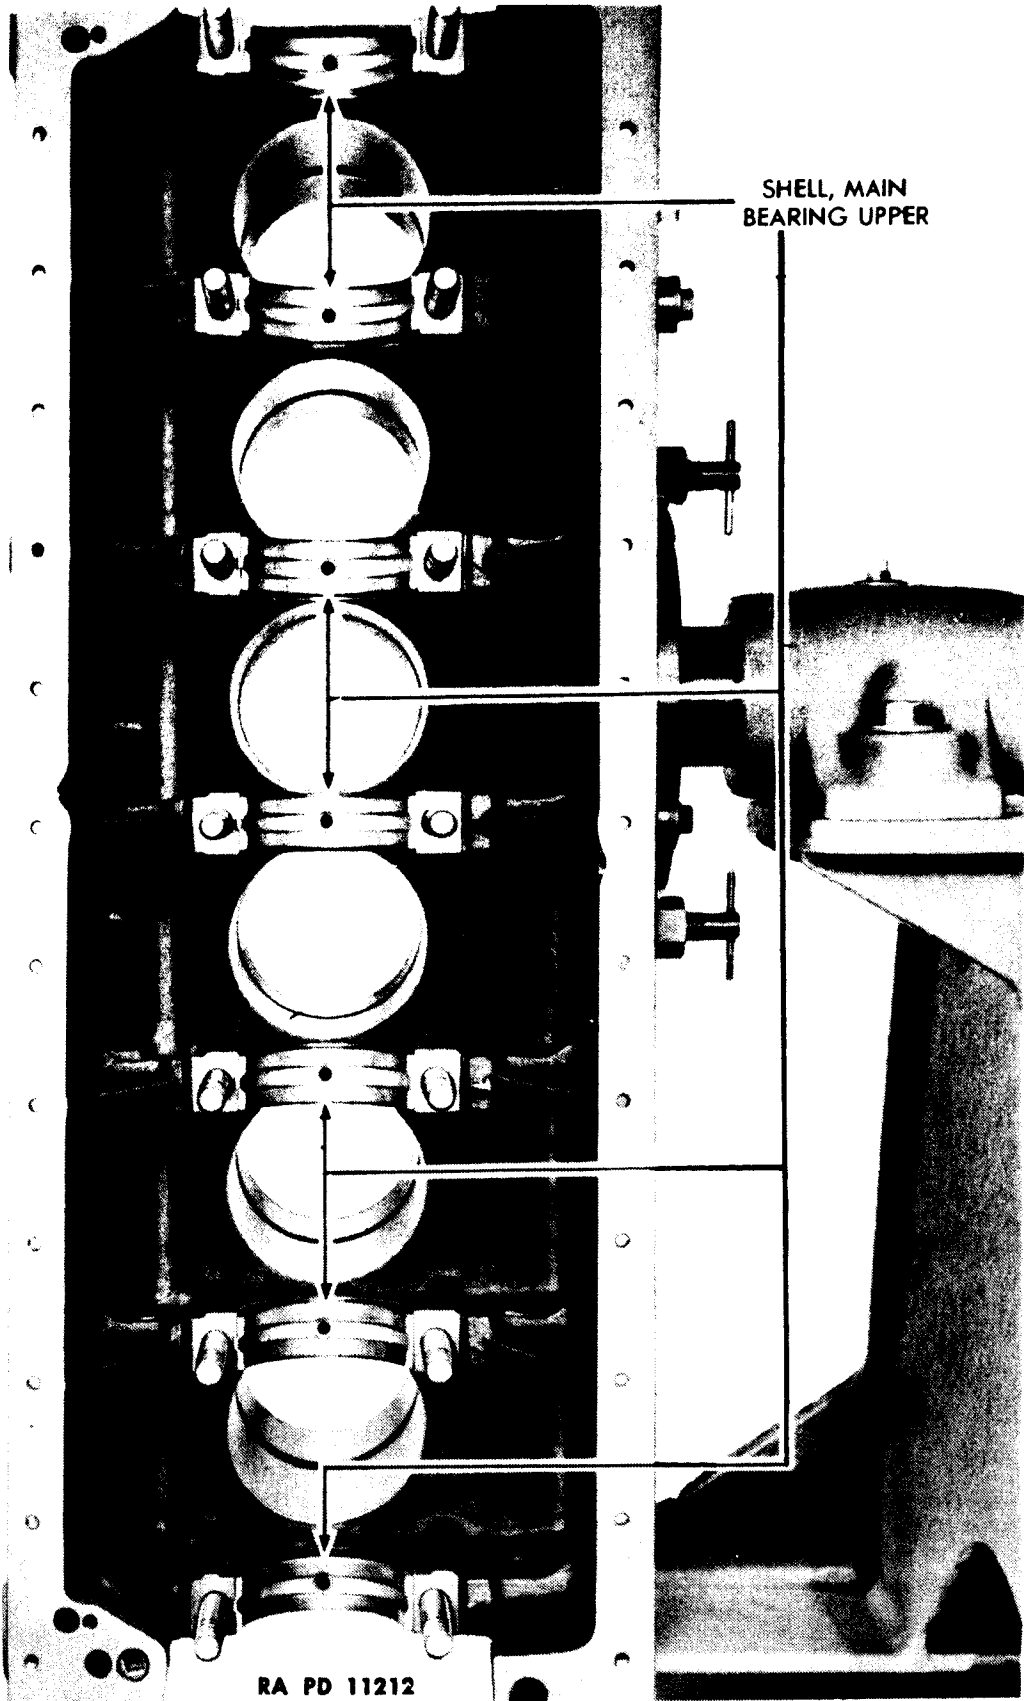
Cylinder Block Showing Upper Main Bearing Shells
